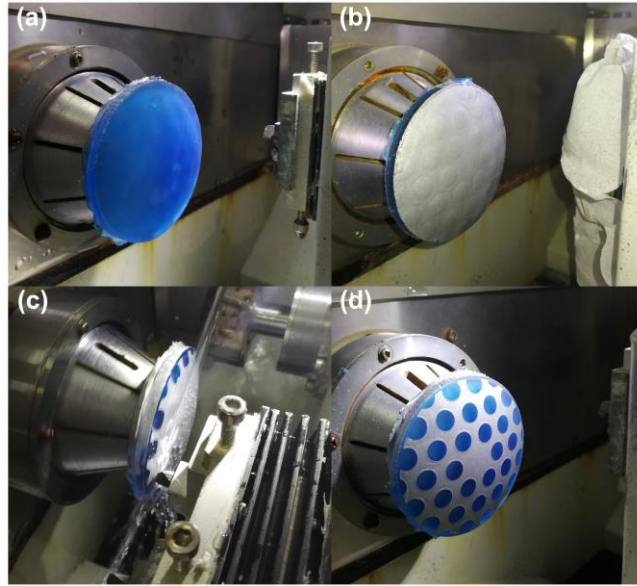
Fabrication of lens array on convex spherical surface. (a) Rough cutting of SFLA; (b) on-machine spray coating on SFLA; (c) surface finishing cutting; (d) gap-masked lens array on spherical surface after finishing cutting.
